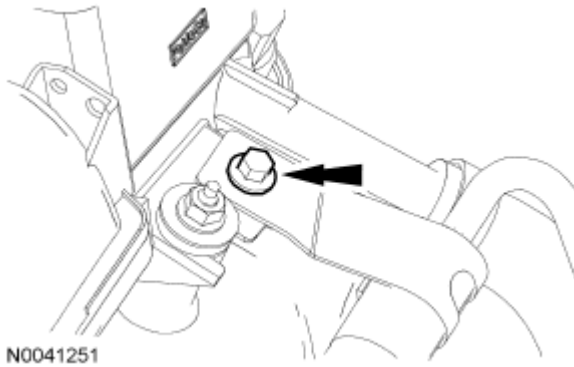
Locating Power Steering Pressure Hose Bracket-To-Power Steering Reservoir Bolt
